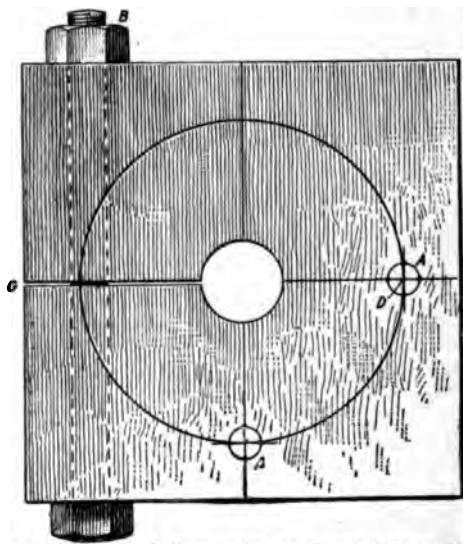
Drilling and Countersinking Crank Centers in Jigs.
